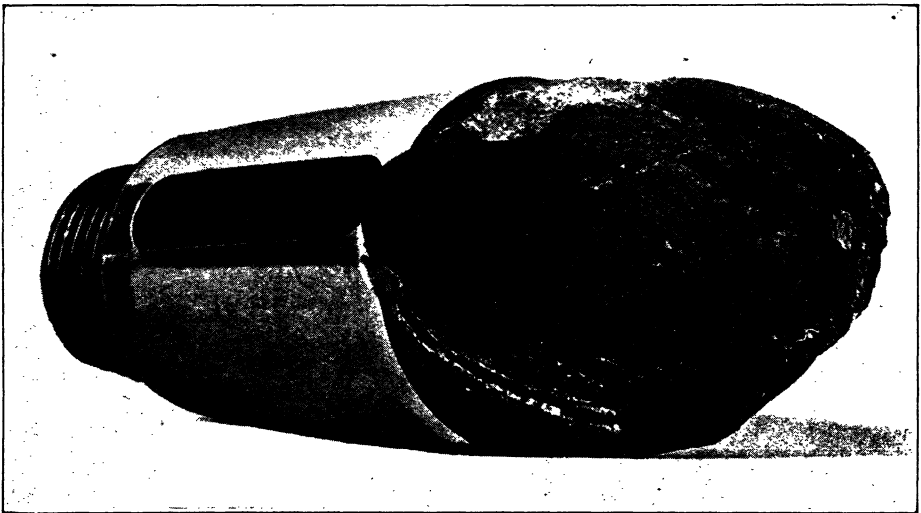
Shaft broken in Torsion, through end of keyway.
